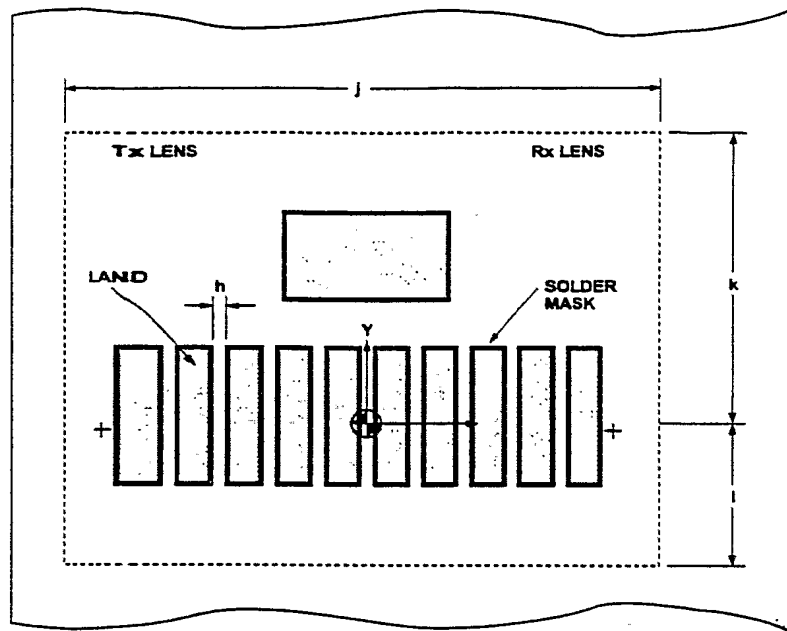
HSDL-3610#007/#017 PCBA – Adjacent Land Keep-out and Solder Mask.
